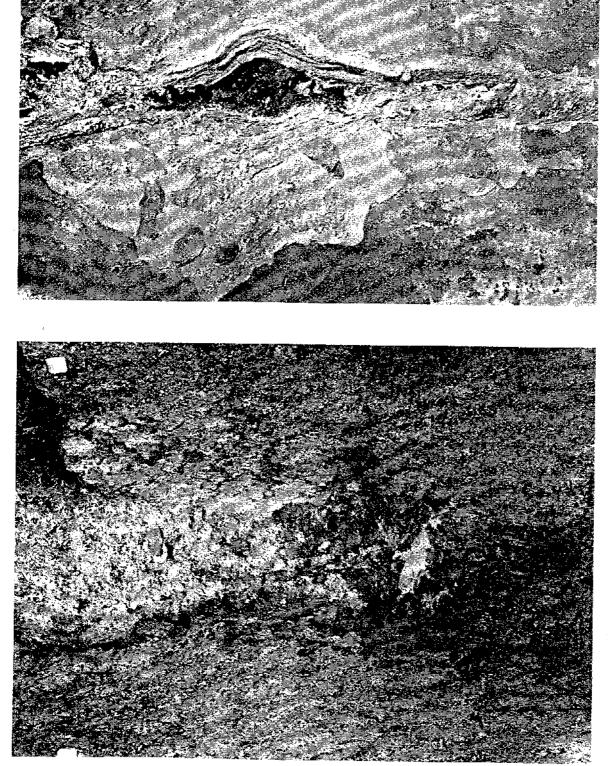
Scale and ash deposits at vertical weld before cleaning and corroded areas revealed by cleaning on inside of alloy-clad retort tube after run 5.
